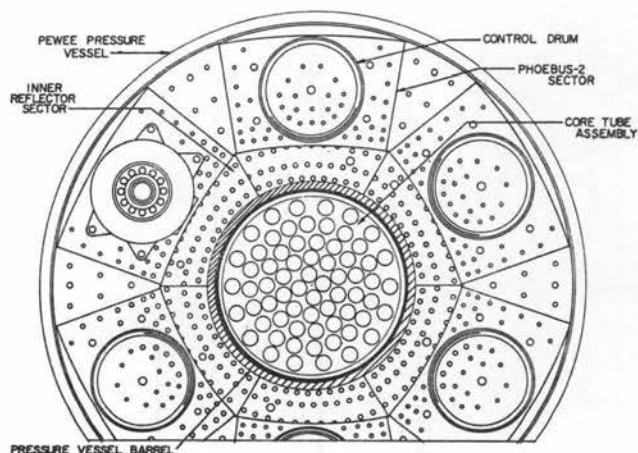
Cross-sectional view of NF-1. The core assembly was water moderated to reduce the uranium critical mass to about 5 kg. The beryllium-reflector assembly was designed to be reusable.
